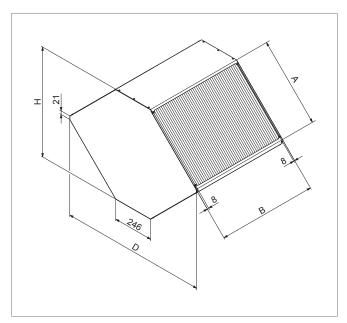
Dimension sheet for Gotthard plate heat exchangers of construction type F (dimensions in mm)  $\,$
